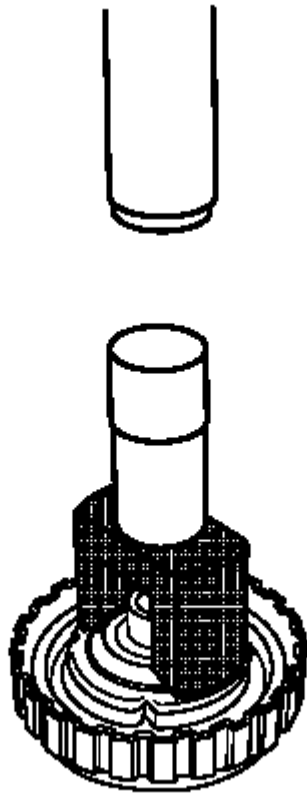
View Of DT-46453 Direct Clutch Adapter On Clutch No. 2 Balancer
